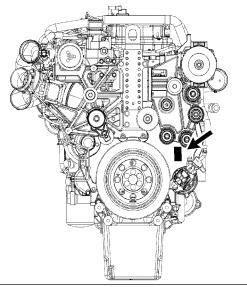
View of the front of a C13 Engine or a C15 Engine g01348222
